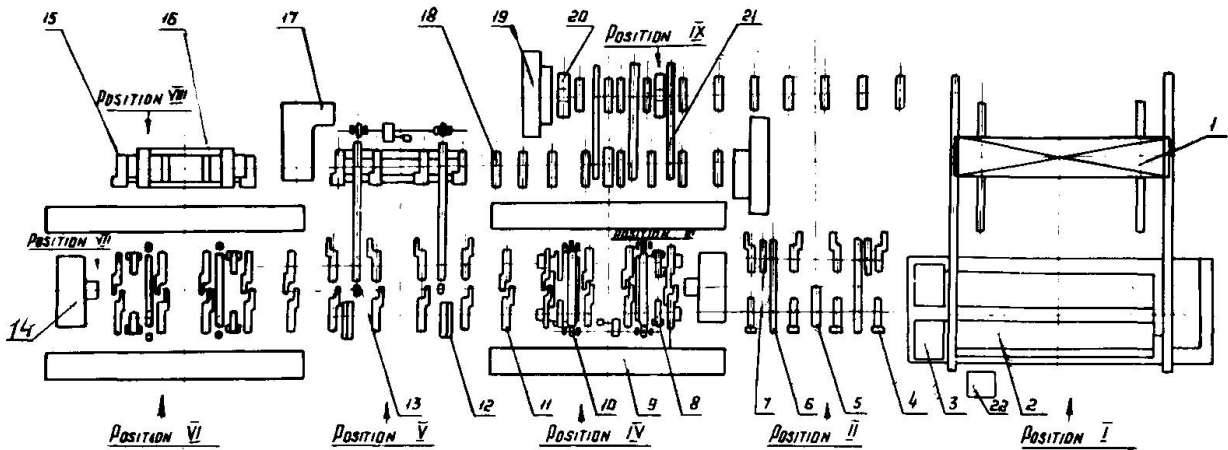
Lay-out of flow line for main girder fabrication: 1 - magnetic sheet steel stacker; 2 - in-feed; 3 - assemblage-and-welding stand; 4 - receiving roller; 5 - output set-up; 6 - conveyor; 7 - tilter; 8 - tilter; 9 - welding machine; 10 - conveyor; 11 - driving roller; 12 - tilter; 13 - conveyor; 14 - flux loading device; 15 - lifting roll-table; 16 - chain-tilter; 17 - straightener; 18 - driving roller; 19 - edge-milling machine; 20 - positioning mechanism; 21 - conveyor; 22 - welding-machine rectifier.
